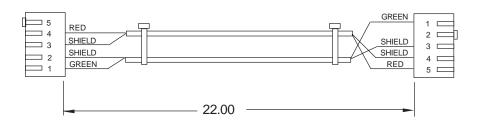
EC1940-01 HARNESS ASSEMBLY - ACCESSORY BOARD TO PREAMP MIC INPUT
